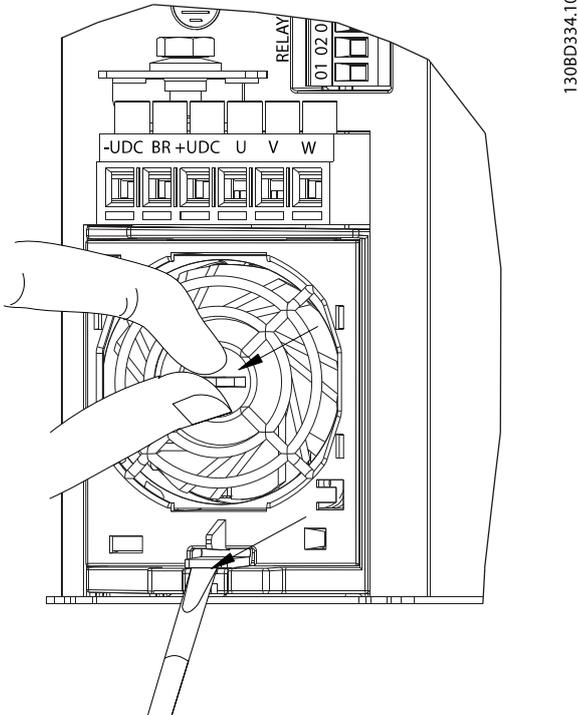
Removing Fan on Enclosure Types J1, J2 and J4
